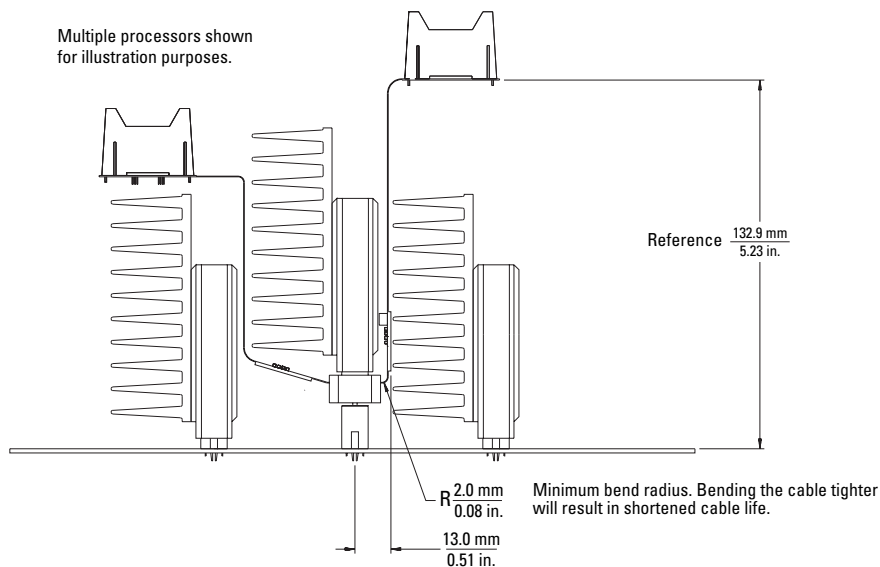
Installed View of E2492B SC 242 (Slot 1) Probe Adapter
